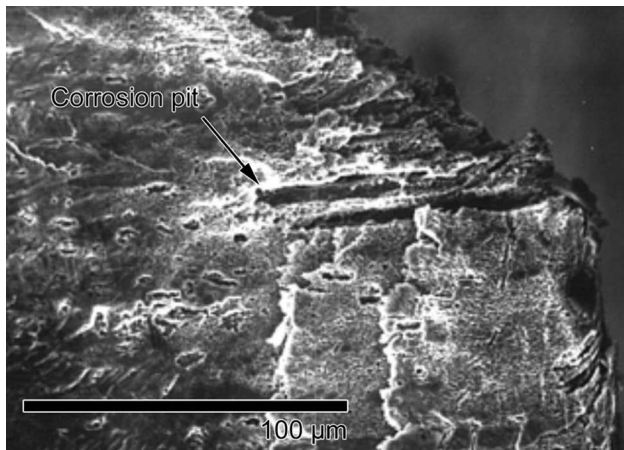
Corrosion pit and corrosion fatigue crack on the fracture surface of a failed TEF lug from an RAAF F/A-18.^[4] Corrosion fatigue is indicated by the brittle appearance of the fracture surface
